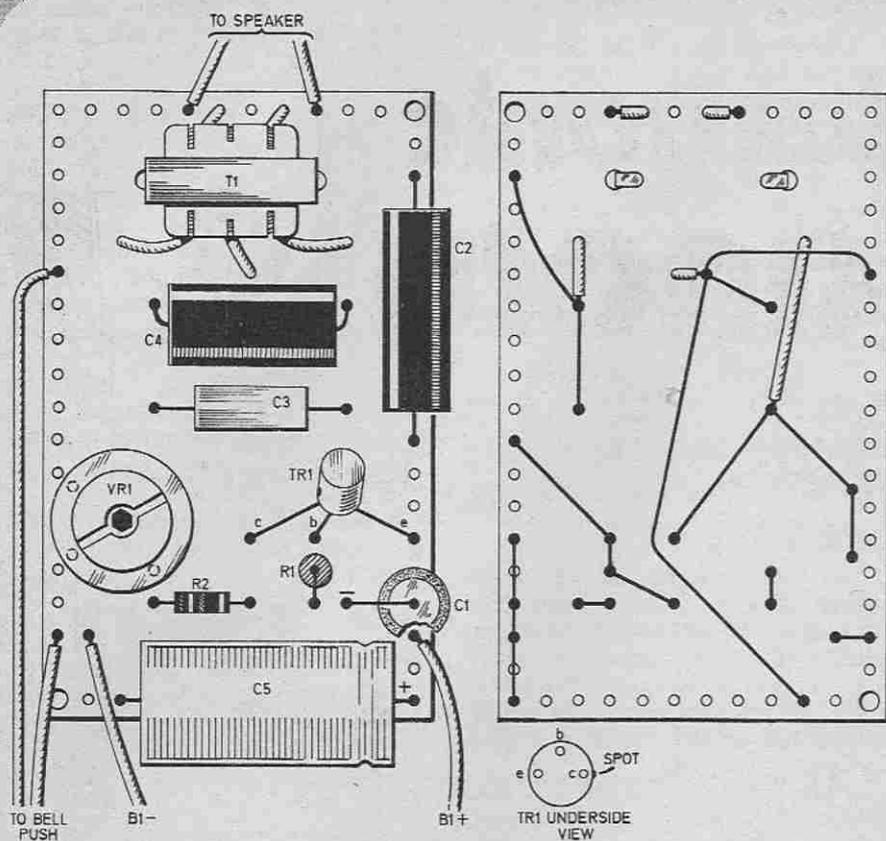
Matrix board layout. The style of the preset may differ from that shown, but the connections will remain the same.
